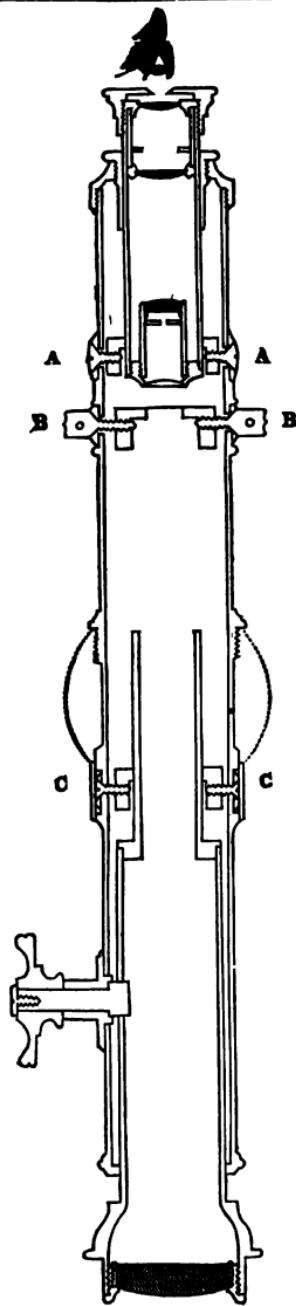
SECTION OF TELESCOPE OF TRANSIT.
